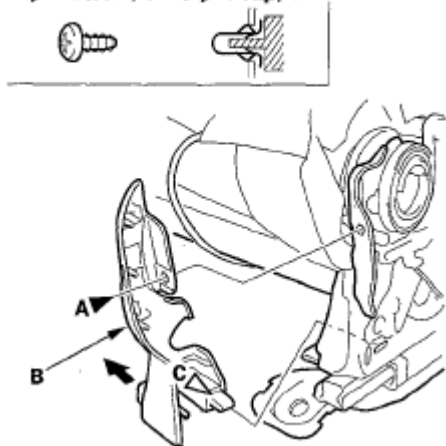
Identifying Recline Inner Cover, Clip And Screw
